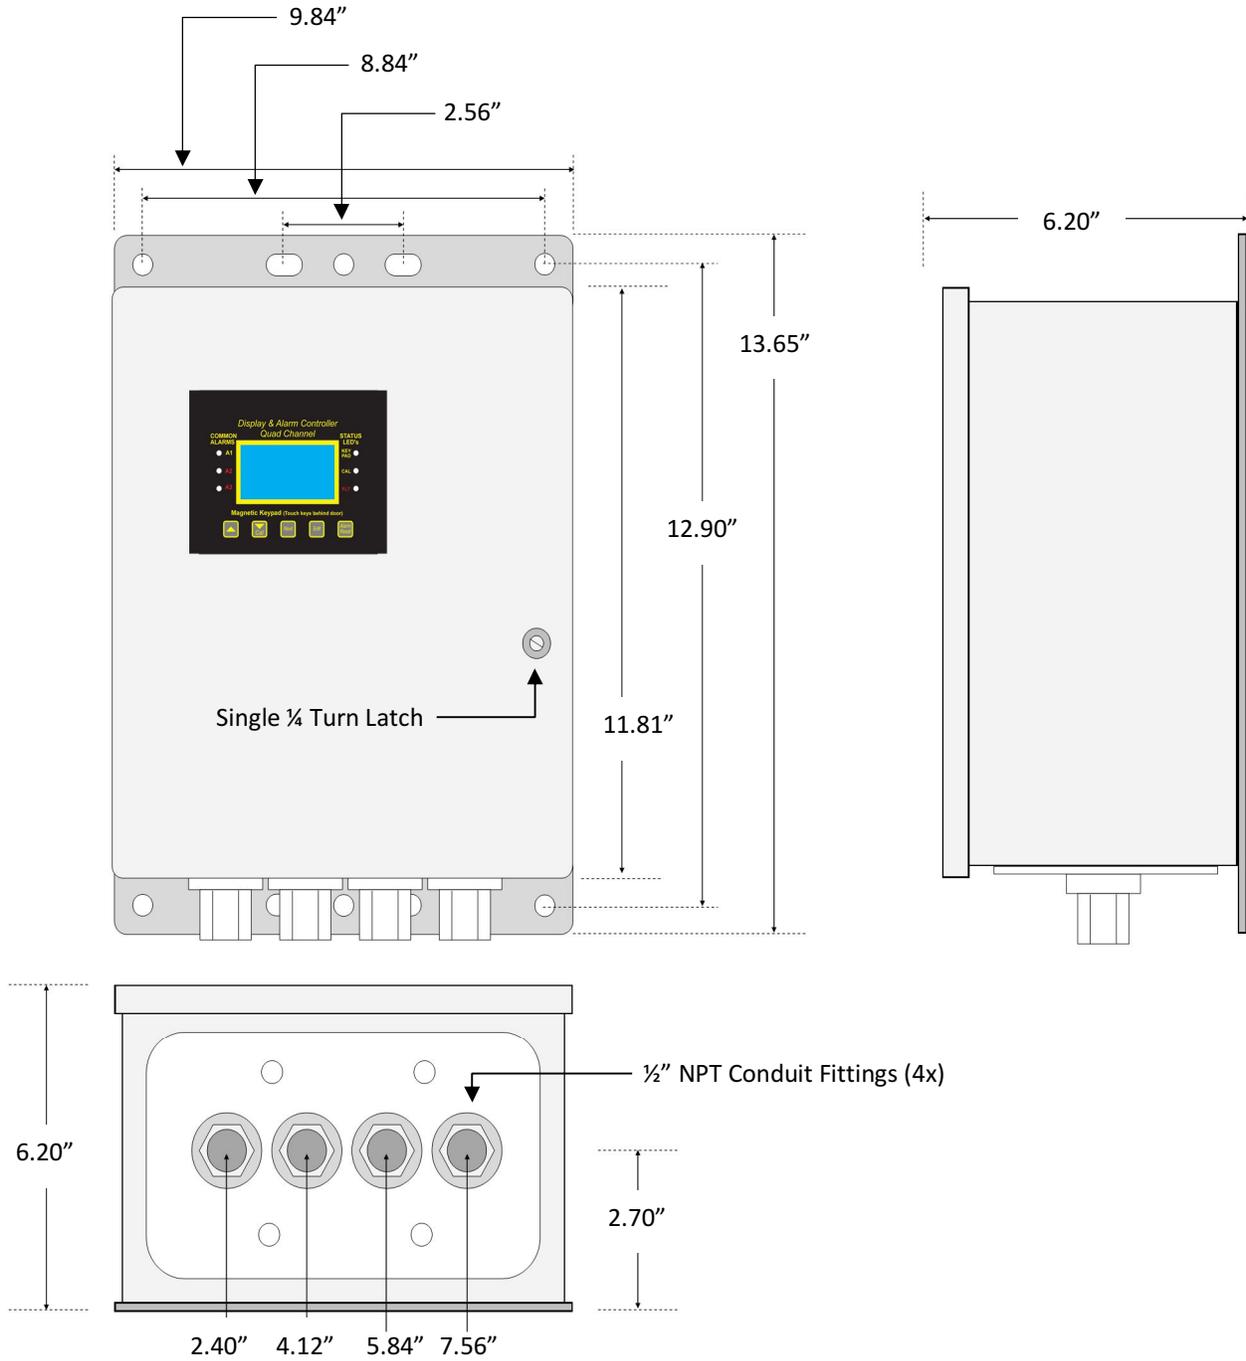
NEMA 4X Painted Steel & Stainless Steel Wall Mount
